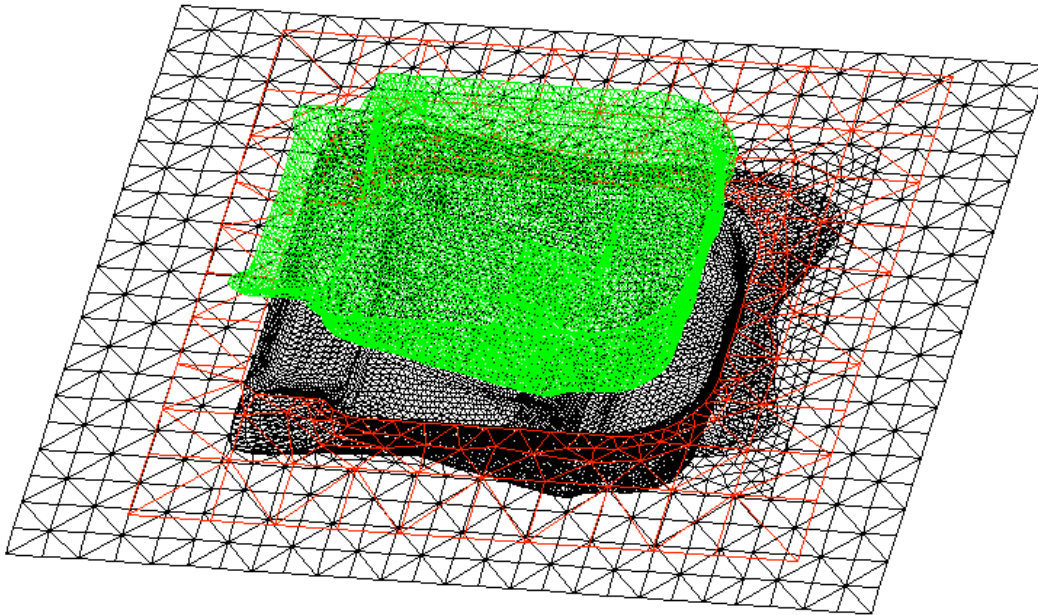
Critical pedal box process conditions and steel blank geometry
